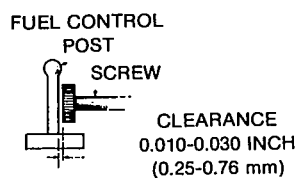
FUEL SOLENOID ADJUSTMENT
